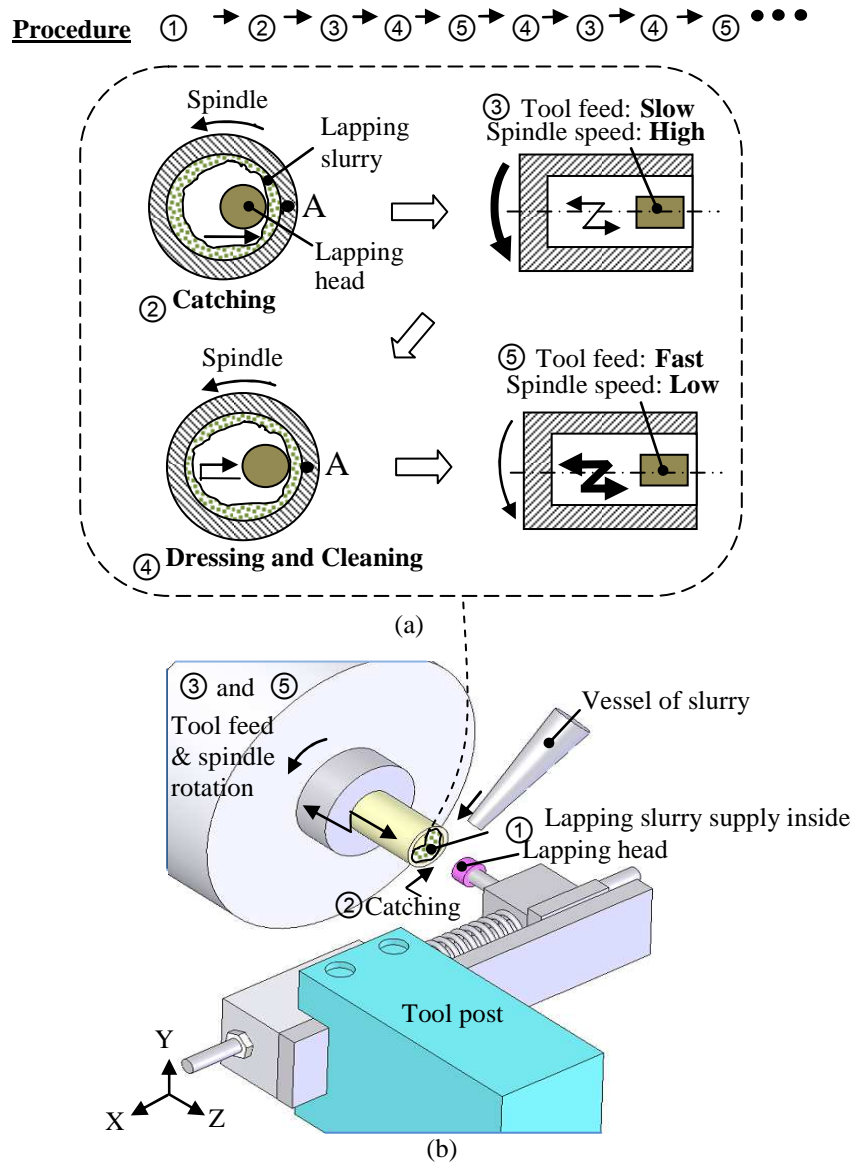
Lapping method for mirror-like finish on cylindrical inner surface by the lathe with linear motor
